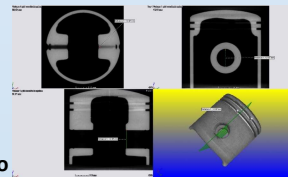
X-ray cross section of a broken piston at different orientations. A 3D model for CAD remanufacture in CNC or rapid prototype.
